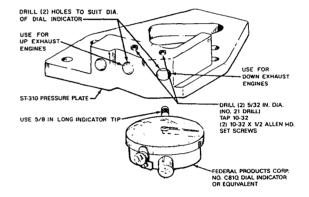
Details for Modifying Tool ST-71 For Use With a Dial Indicator (Parallel Valve Cylinders)
